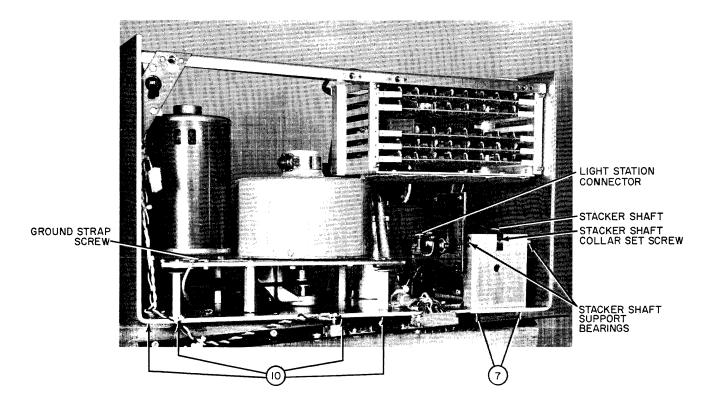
Rear View, Cover and Rear Connector Panel Removed
